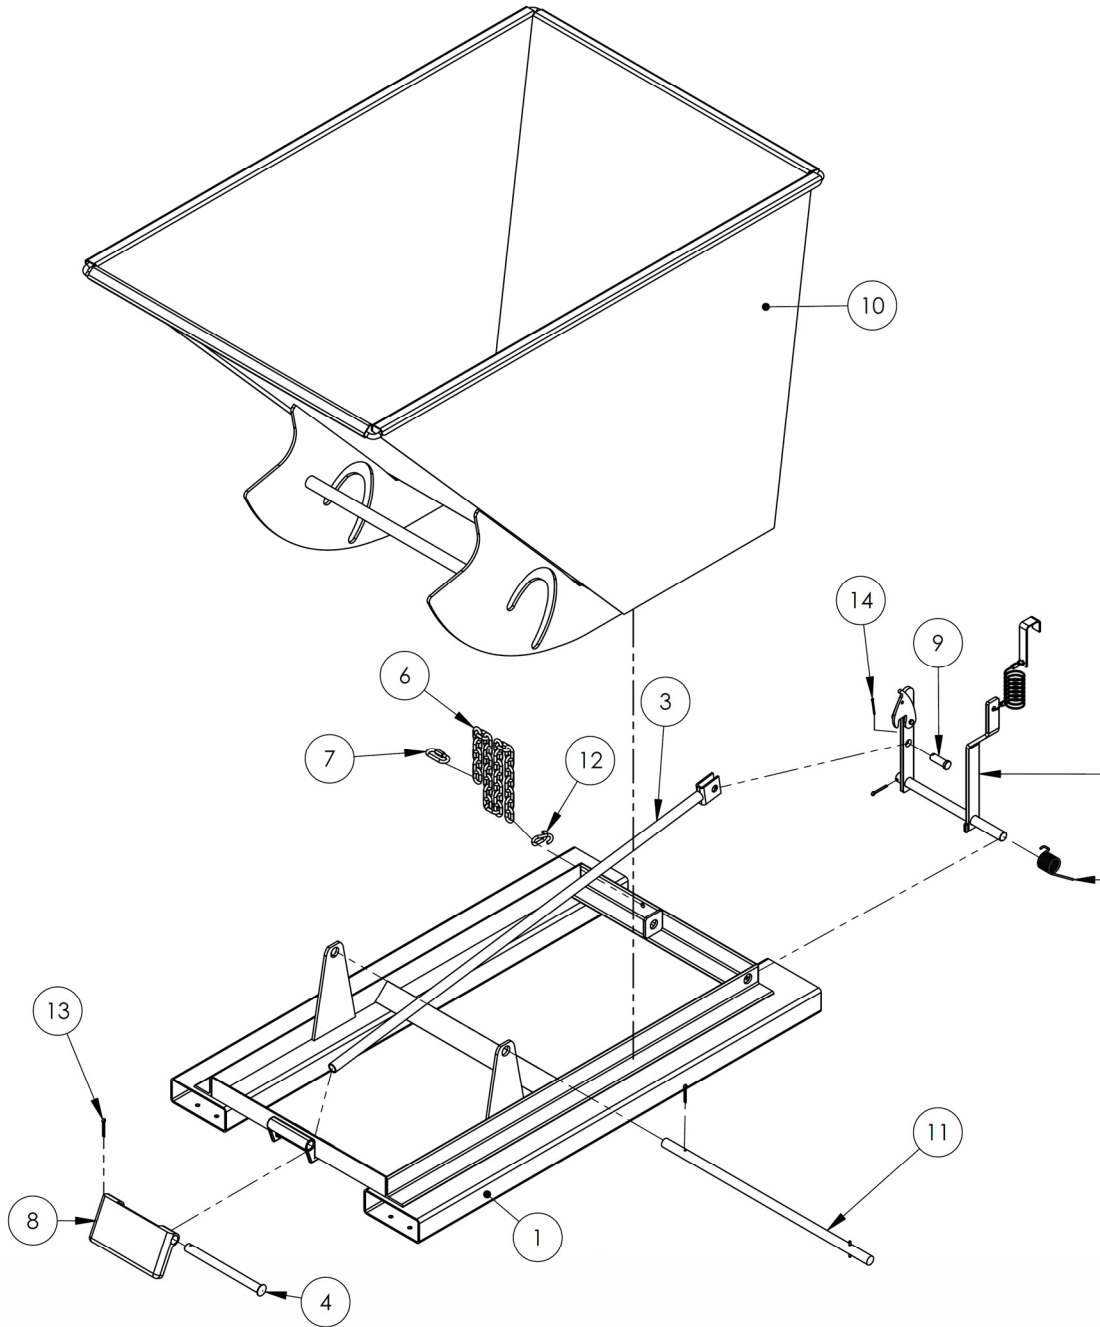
D-100 series hoppers exploded parts diagram &amp; bill of materials
